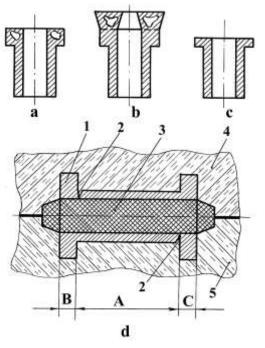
Defects in castings and principles of their design: a – formation of shrinkage cavity in casting; b-installation of a riser; c-principle of simultaneous solidification; d-formation of cracks: 1-casting; 2-crack; 3-core; 4-upper half-mould; 5-lower half-mould
